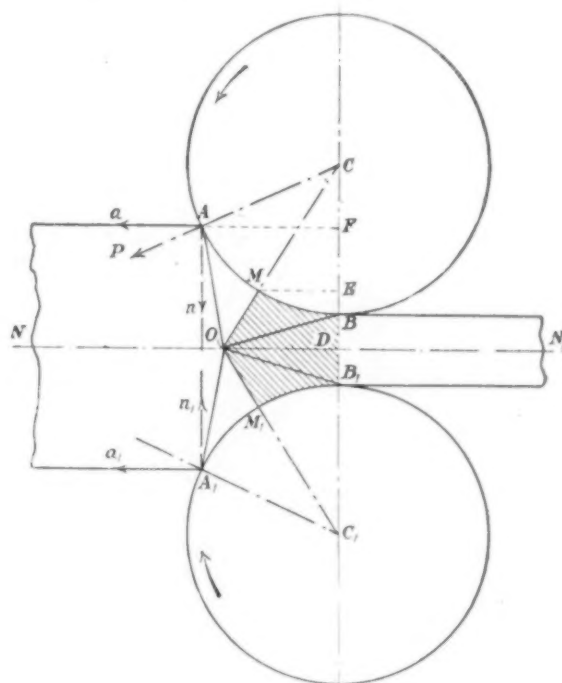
CROSS-SECTION OF A ROLLING MILL THROUGH THE ROLLS AND PIECE OF METAL BEING ROLLED
